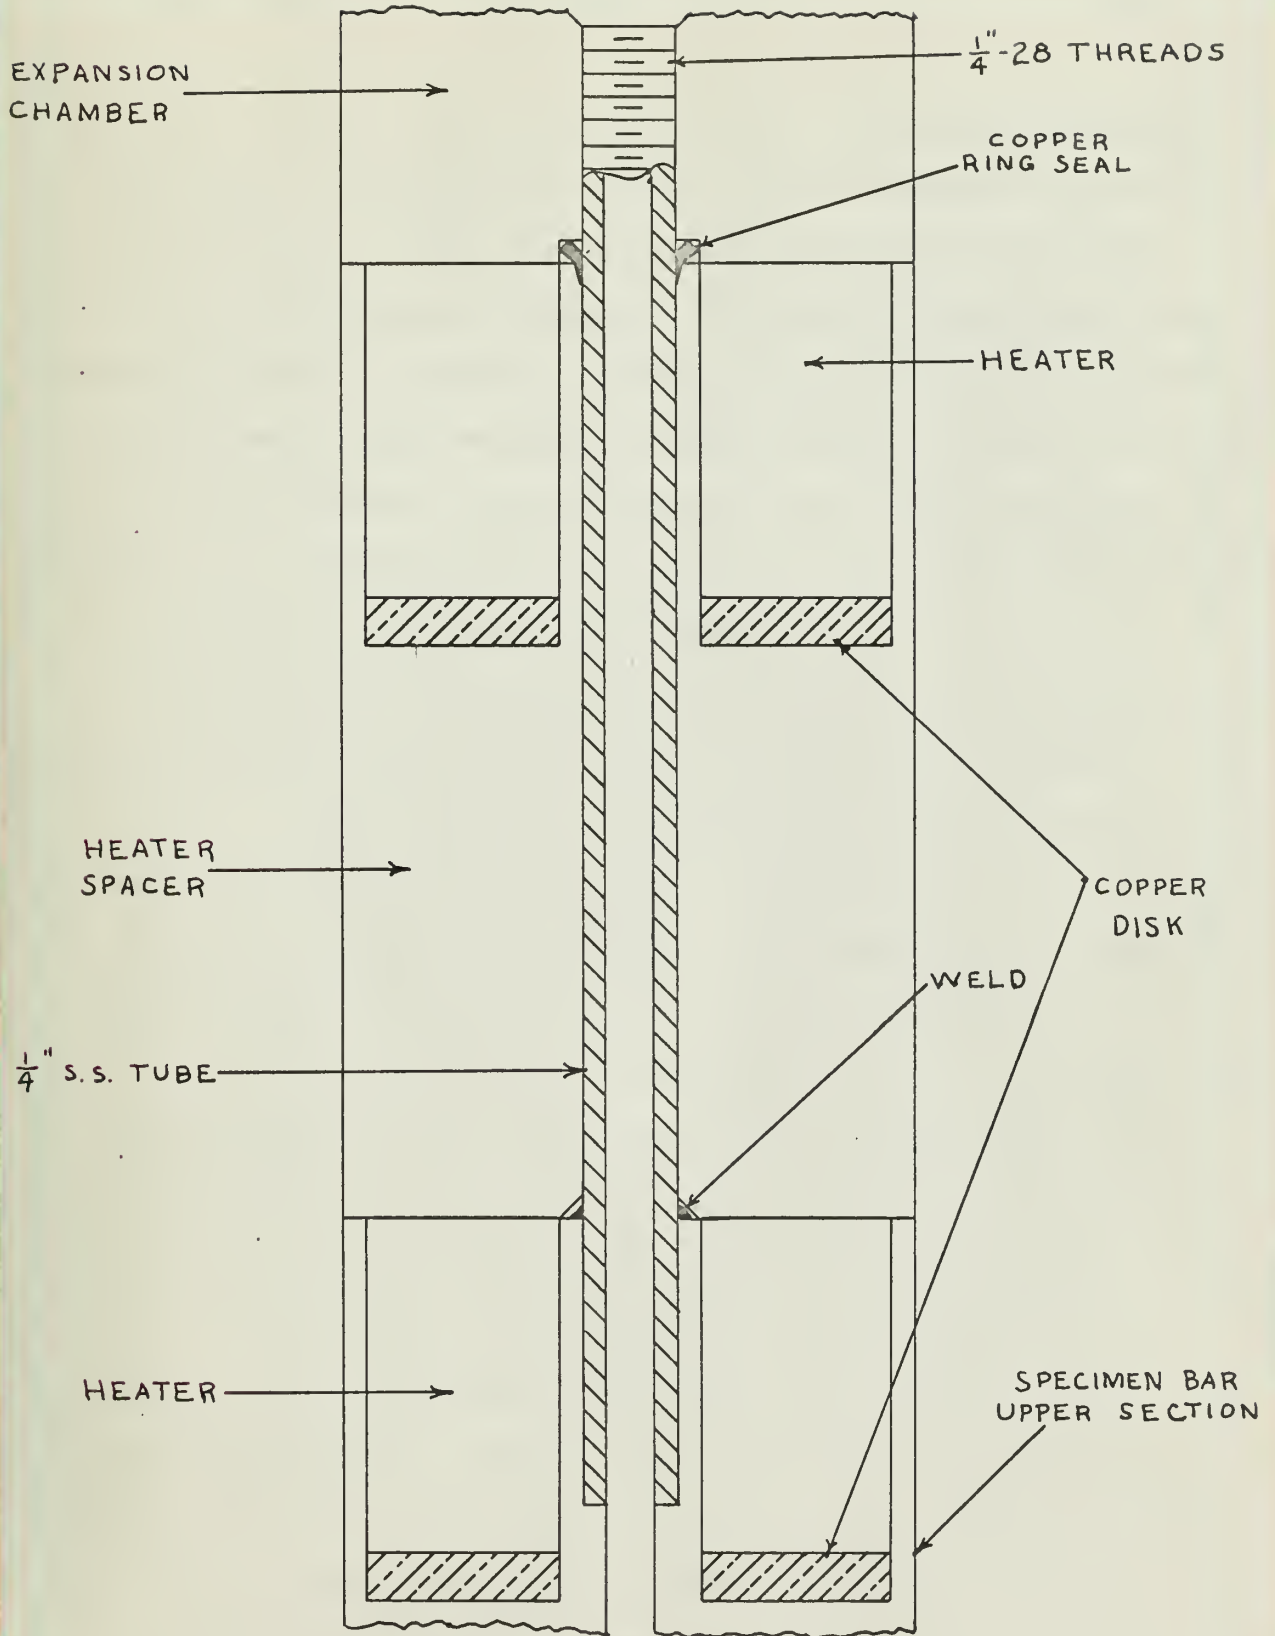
Exploded cross-sectional view of upper portion of the specimen bar assembly, showing copper ring sealing arrangement.
